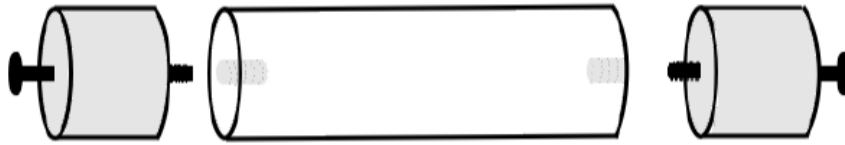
Cylinder assembly of two separate metal electrodes and an insulating cylinder.
